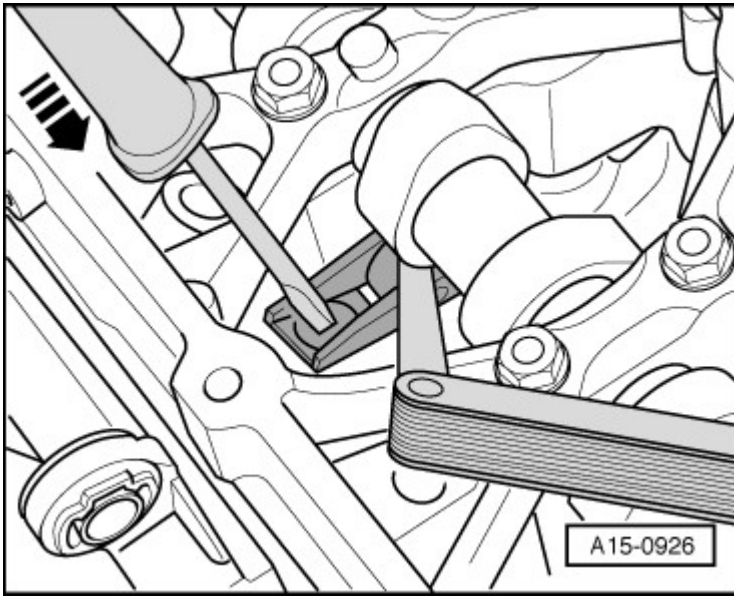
Checking Play Between Cam Lobes & Roller Rocker Lever
